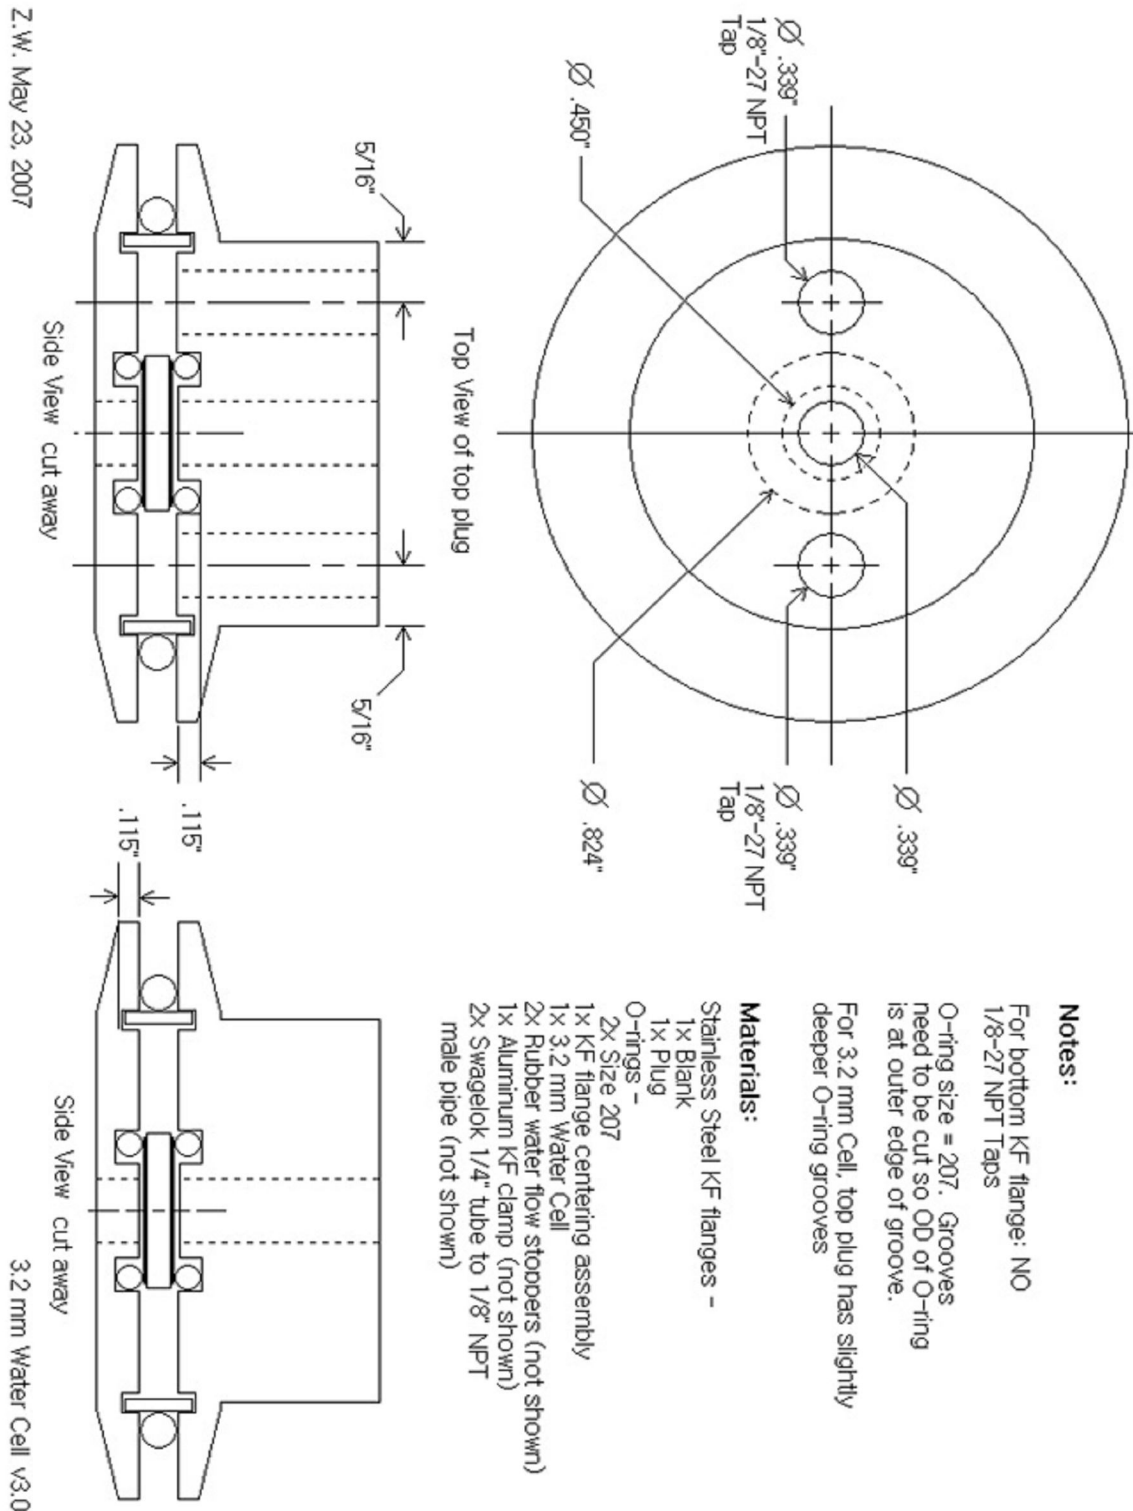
A schematic of the stainless steel water cell housing cut to hold the 3.2 mm water cell. It is made by compressing 2 stainless steel KF flanges with grooves cut 0.115" deep for size 207 O-rings which seal against the water cell windows preventing leaking.
